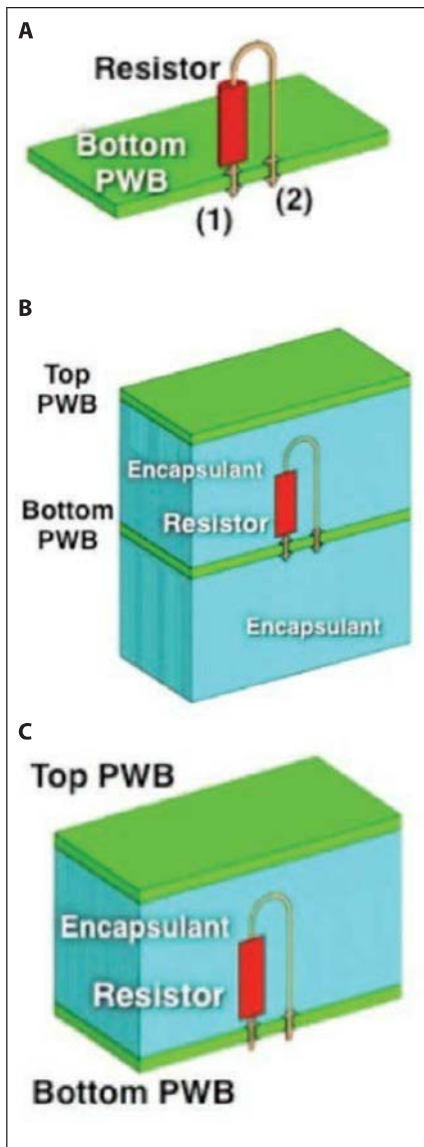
Solid models show the single symmetry plane of the assembly: A — Resistor, its solder joints (labeled 1 and 2), and the PWB; B — both PWBs and the encapsulant located between them and underneath the bottom PWB; C — the same as B except the encapsulant was eliminated from underneath the bottom PWB.
